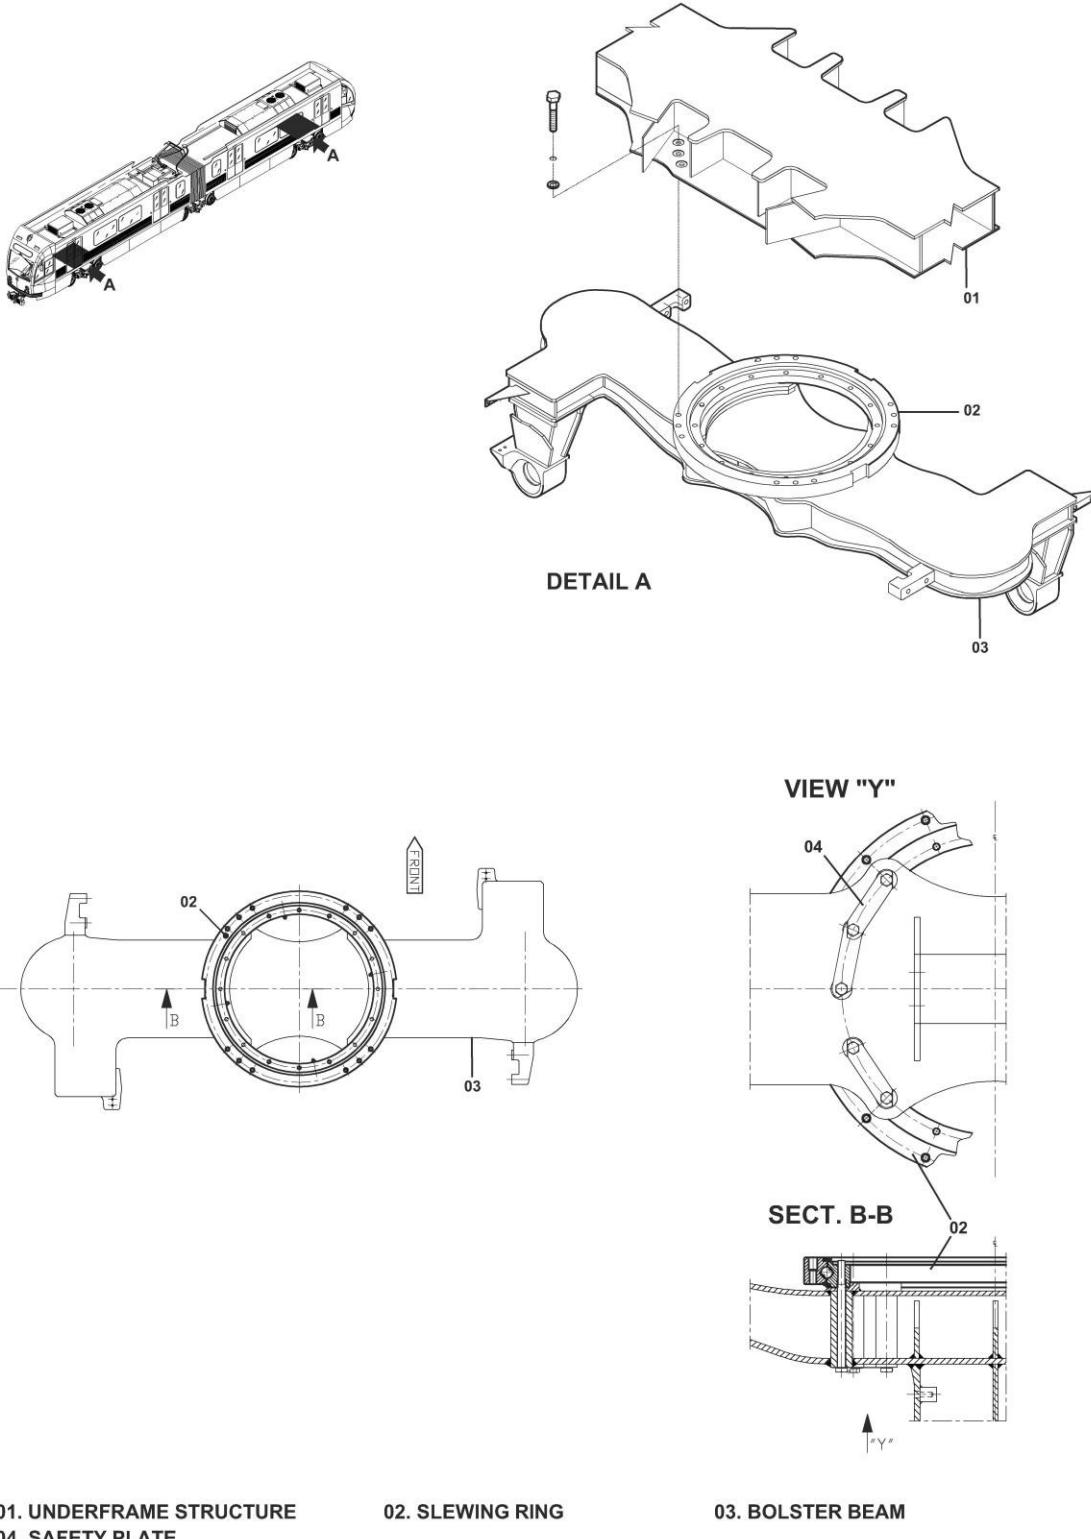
I-02.8 Motor Truck Slewing Ring (2)
